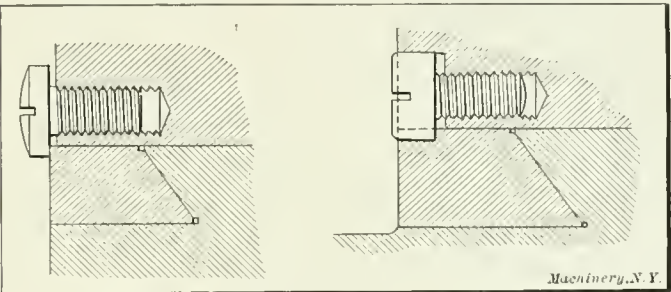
and 8. Strips with Countersunk Square Heads and Collar-head Adjusting Screws
